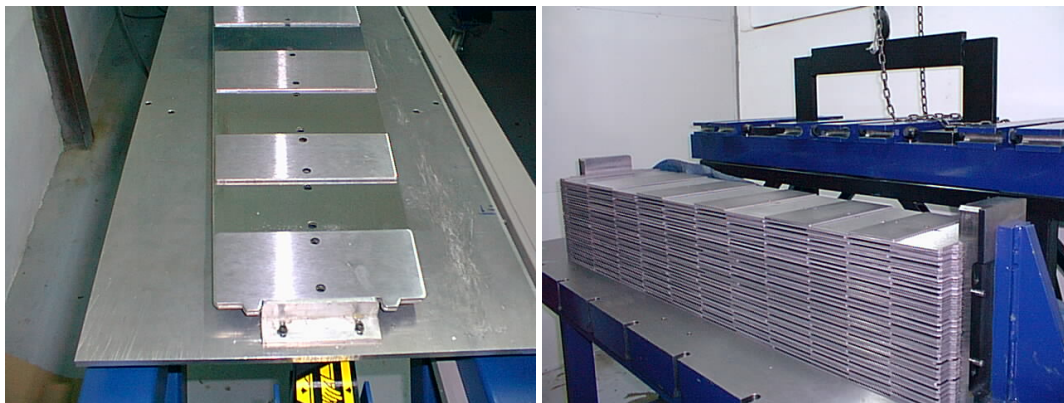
One layer of spacer plates being fastened to the master below through spring pins and structural adhesive (left). A submodule being assembled on the stacking fixture, the keys at either end precisely align the master plates (right).
